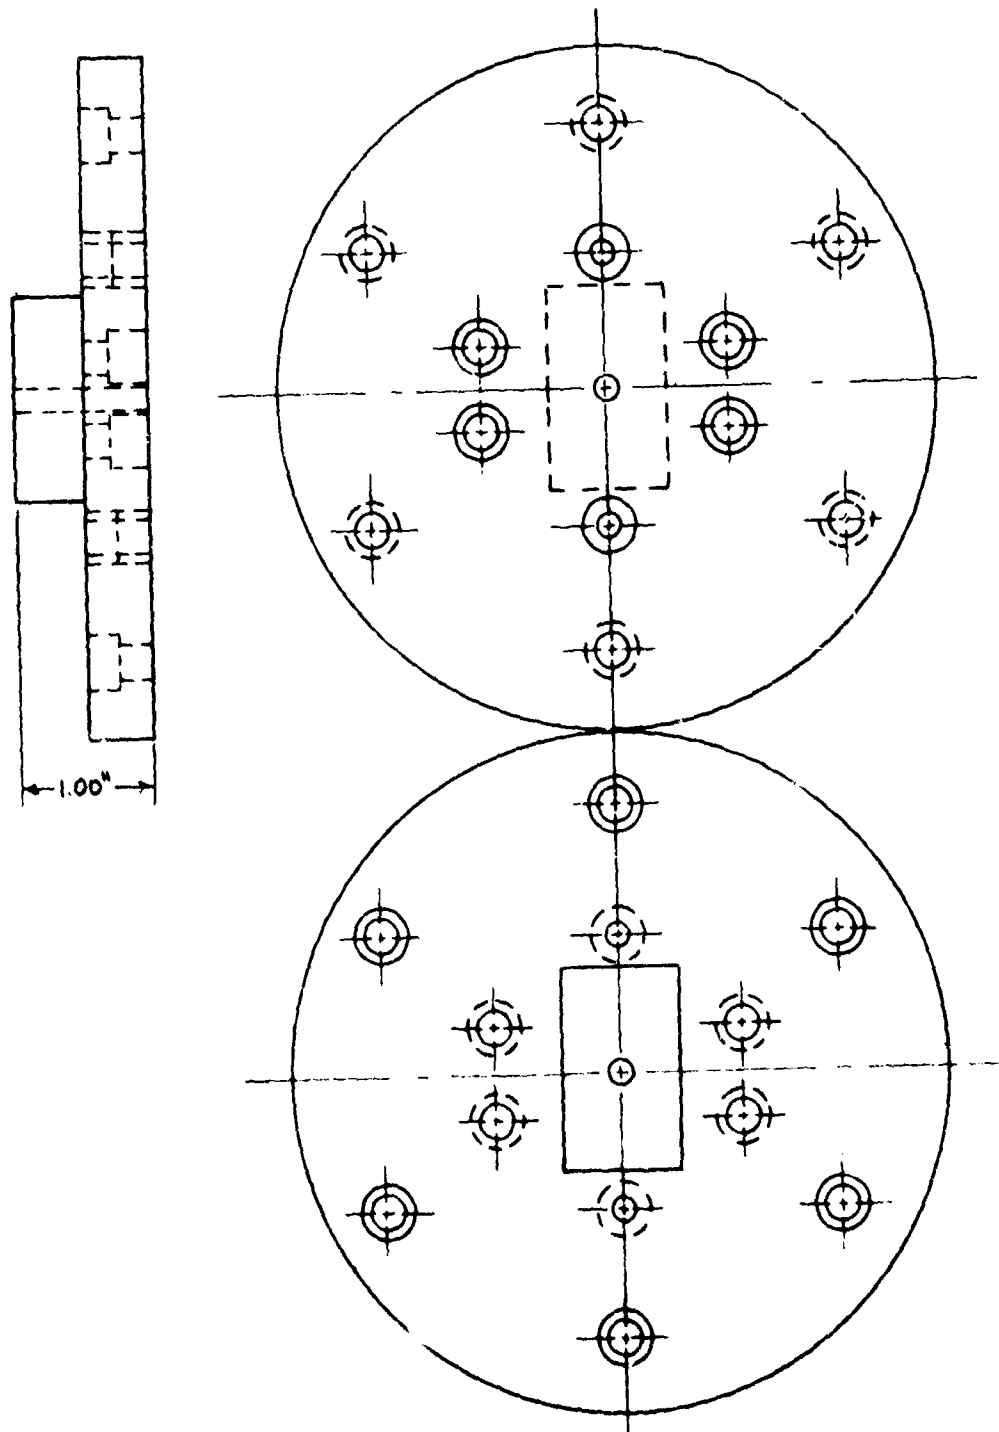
,18 WORKING DRAWING OF TOP OF SLIDE WIRE GAGE
